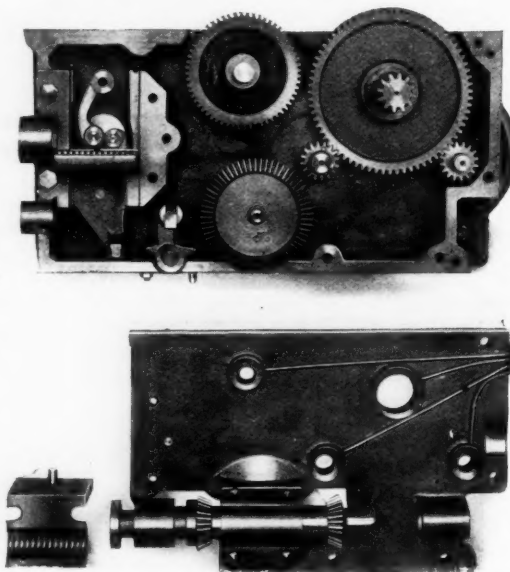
Arrangement of Gearing in Apron which is of Double Plate Type
